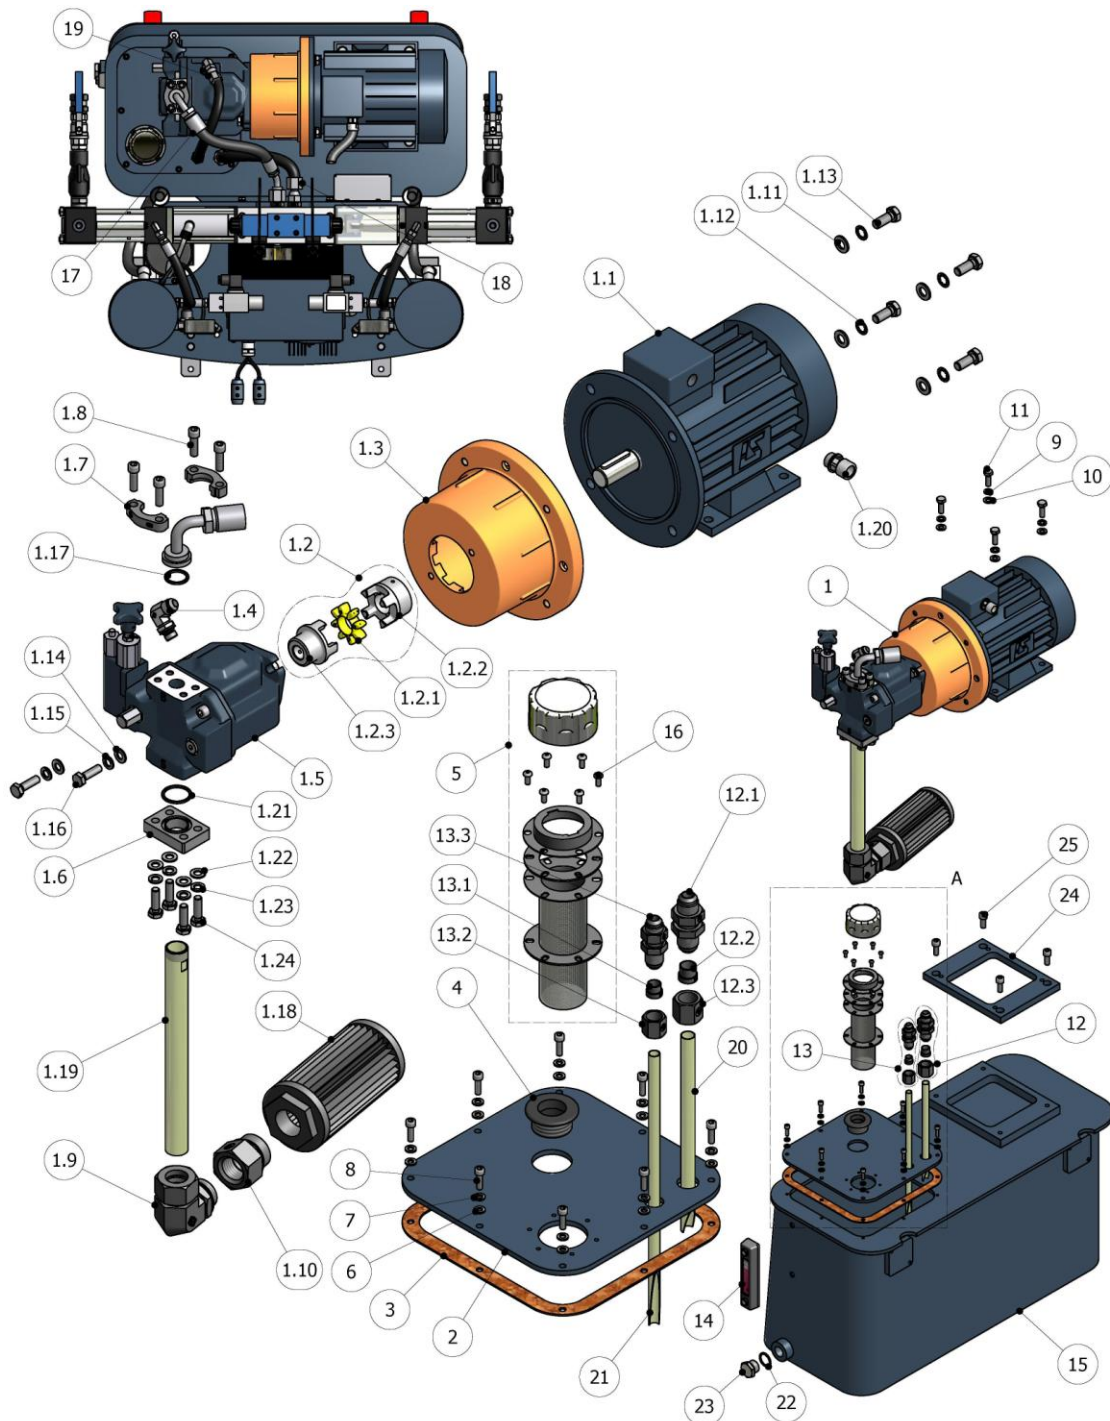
Hydraulic Manifold 3x400v50/60Hz (hyd. Pump 18 cc), Exploded View
